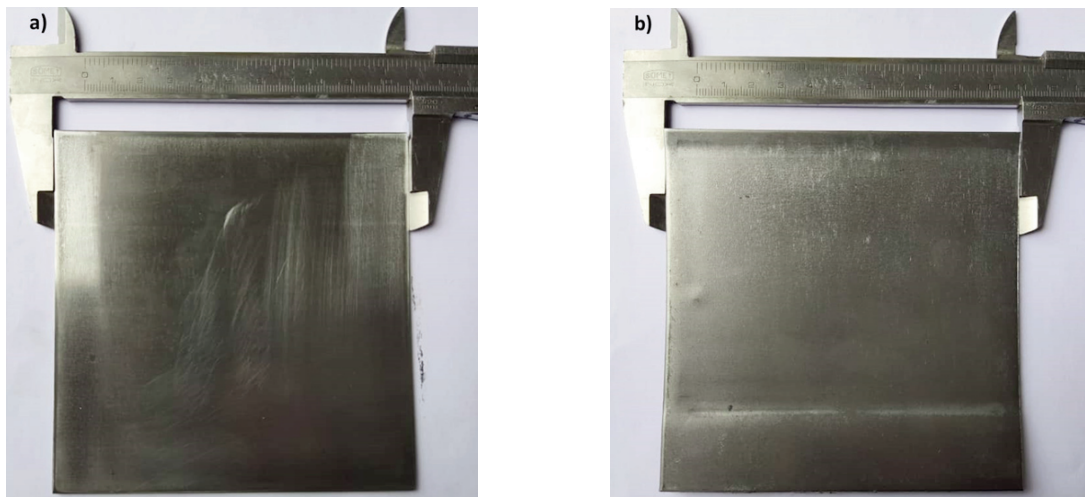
DC04 steel sheet a) before ECAP, b) S1 after ECAP
